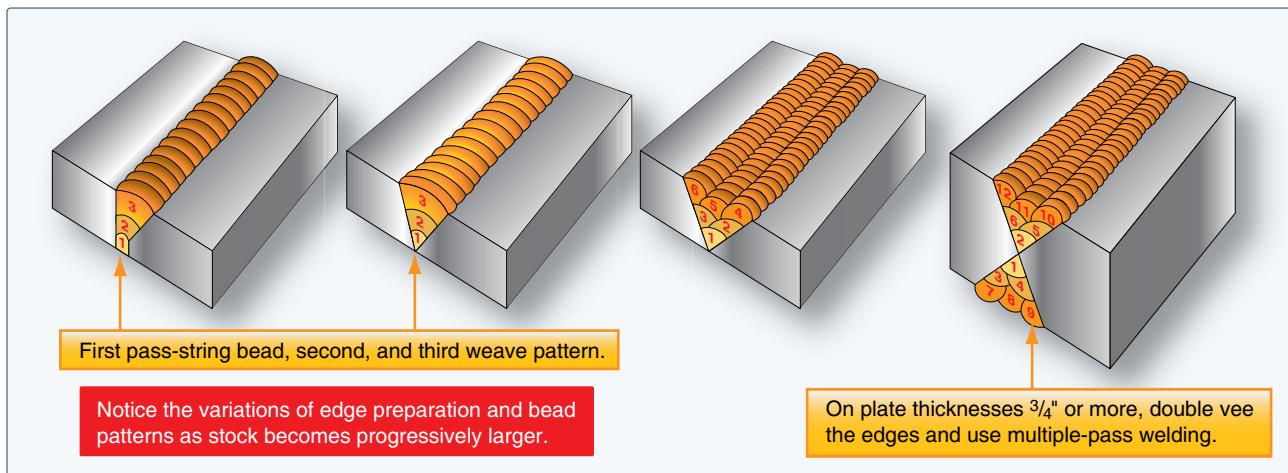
Multiple-pass groove welding of butt joints.
